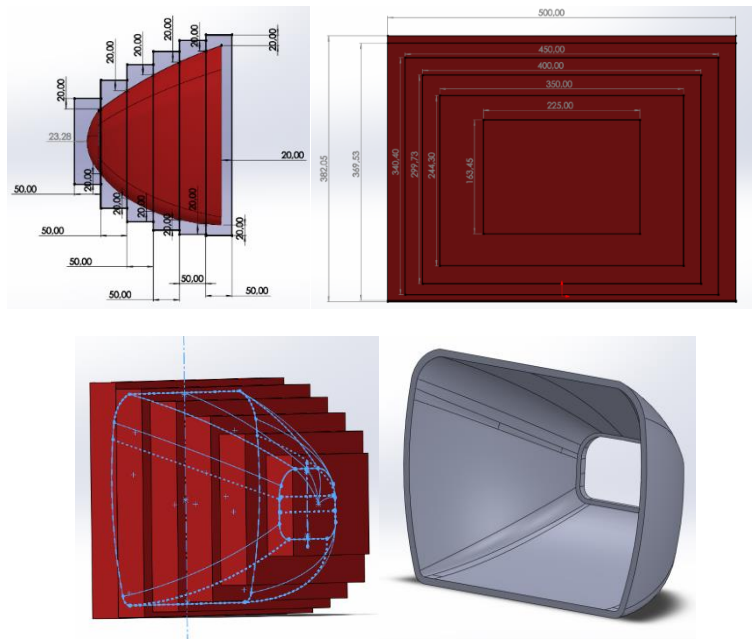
Stock definition (In red the epoxy plates before machining, and in grey a final machined mould)
